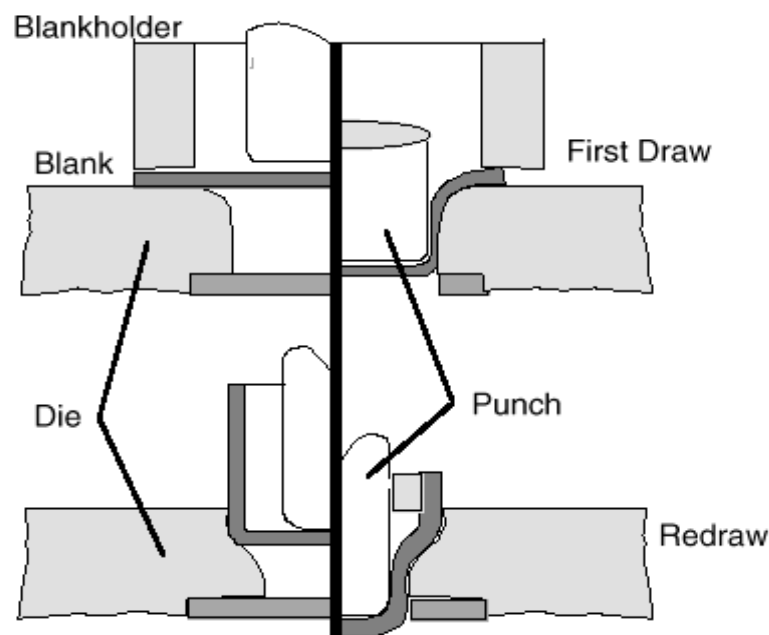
Direct Deep Drawing of seamless tubes from circular blanks.
